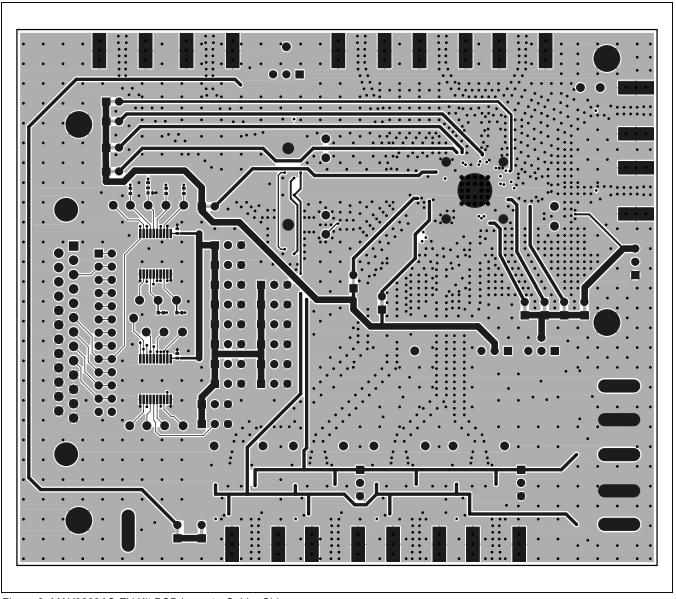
MAX2839AS EV Kit PCB Layout—Solder Side
